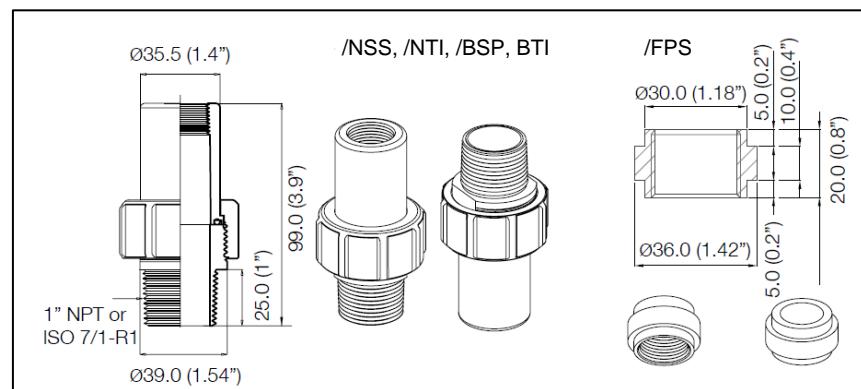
Dimensions 1" FU20-FTS/MTS adapter Stainless Steel & Titanium and FU20 -FTS/MTS adapter for FF40, FS40 and FD40 fittings
